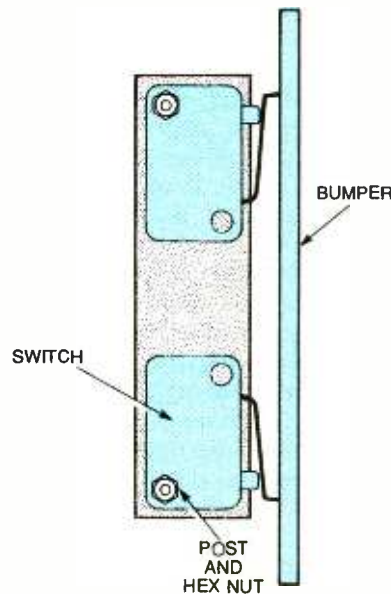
Here's an overhead diagram of the bumper-switch assembly. The switches pivot on their mounting bolts when the bumper is hit.
